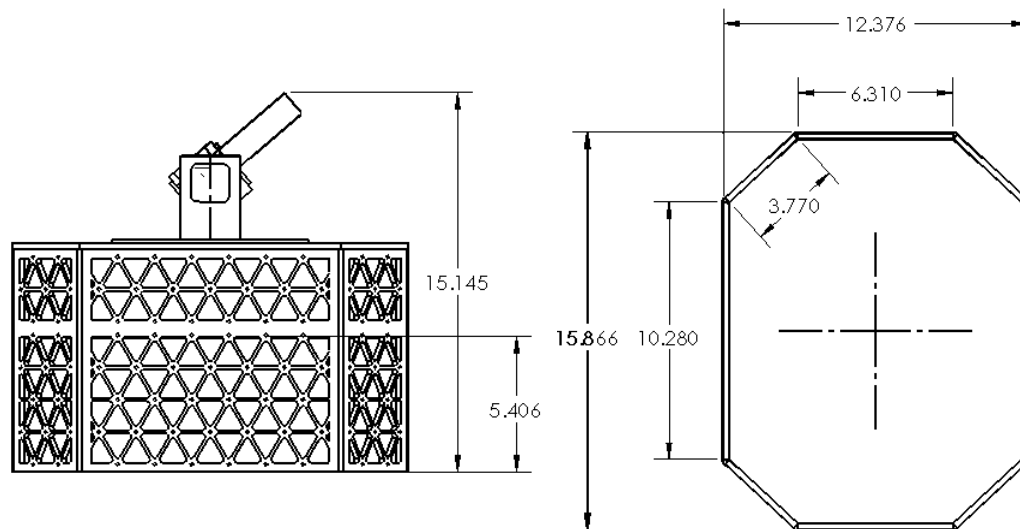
Dimensioned view (inches) of the payload illustrating height (left) and bottom footprint size (right)
